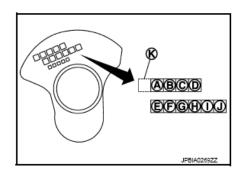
Identifying Journal And Pin Diameter Grade Numbers Courtesy of NISSAN MOTOR CO., U.S.A.
